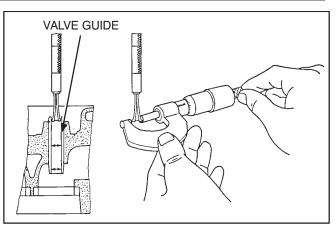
MEASURING VALVE GUIDE BORE
